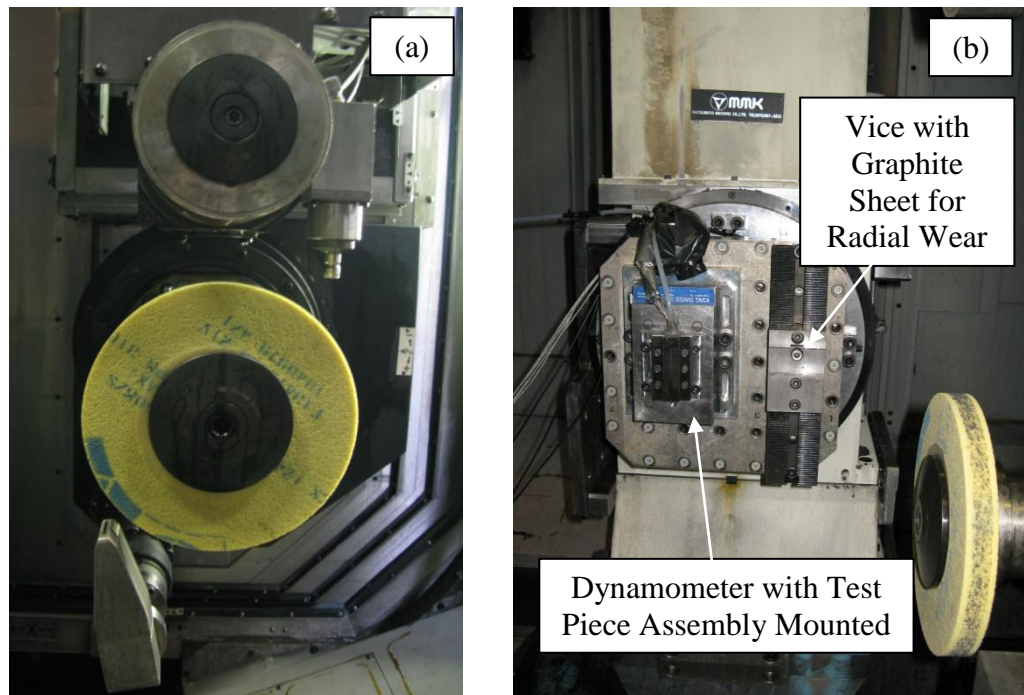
Makino A99 grinding setup: (a) Grinding wheel, dresser roll and cutting fluid nozzle cut setup, (b) Work piece and pallet setup.
